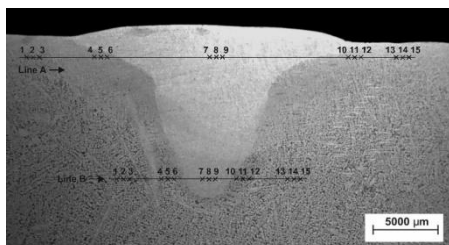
The photo of the weld joint macrostructure with indicated lines and place of hardness measurement HV10
